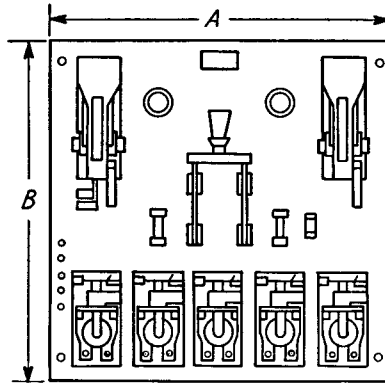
A TYPICAL 4-MOTOR CRANE PROTECTIVE PANEL
